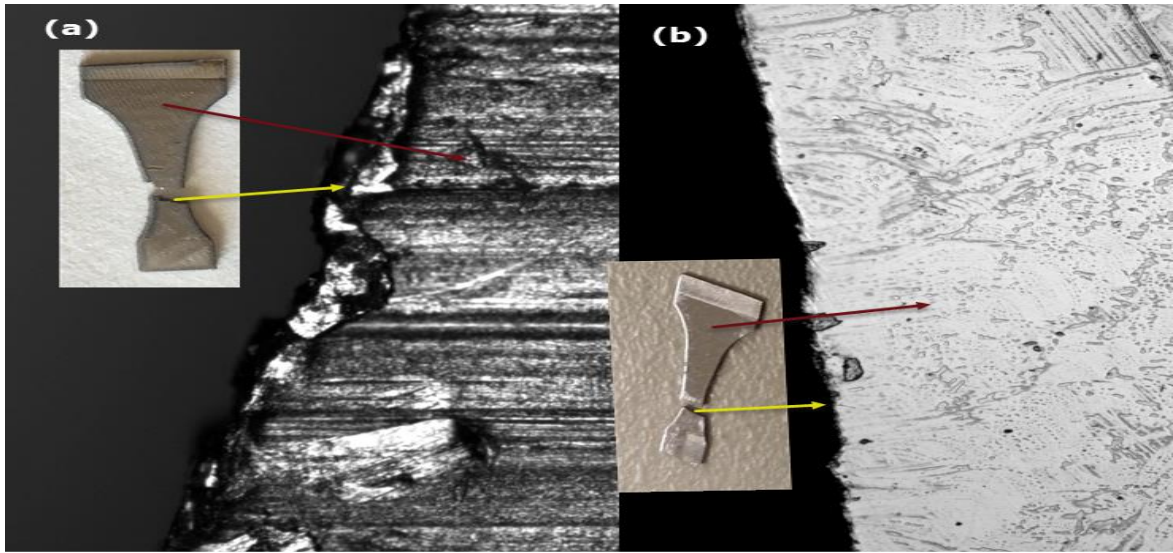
Optical micrographs of polished surface finish and ground surface finish for mini-specimen, (a) shows surface and expected post failure in the gage section condition of as received mini specimen, (b) shows polished surface finish and failure in the gage section.
